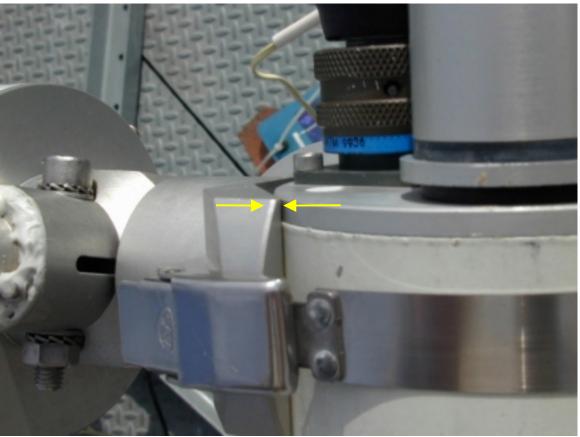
Attached sensor head edge should be flush with the robot claw edge
